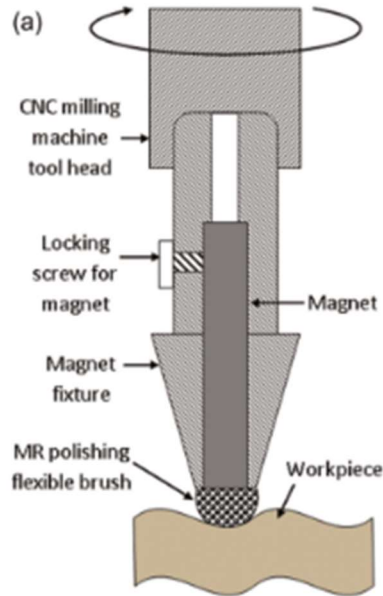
Schematic of CNC milling machine connected to a neodymium magnet that serves at creating a flexible ball end MR finishing tool (Reprinted from [36])
